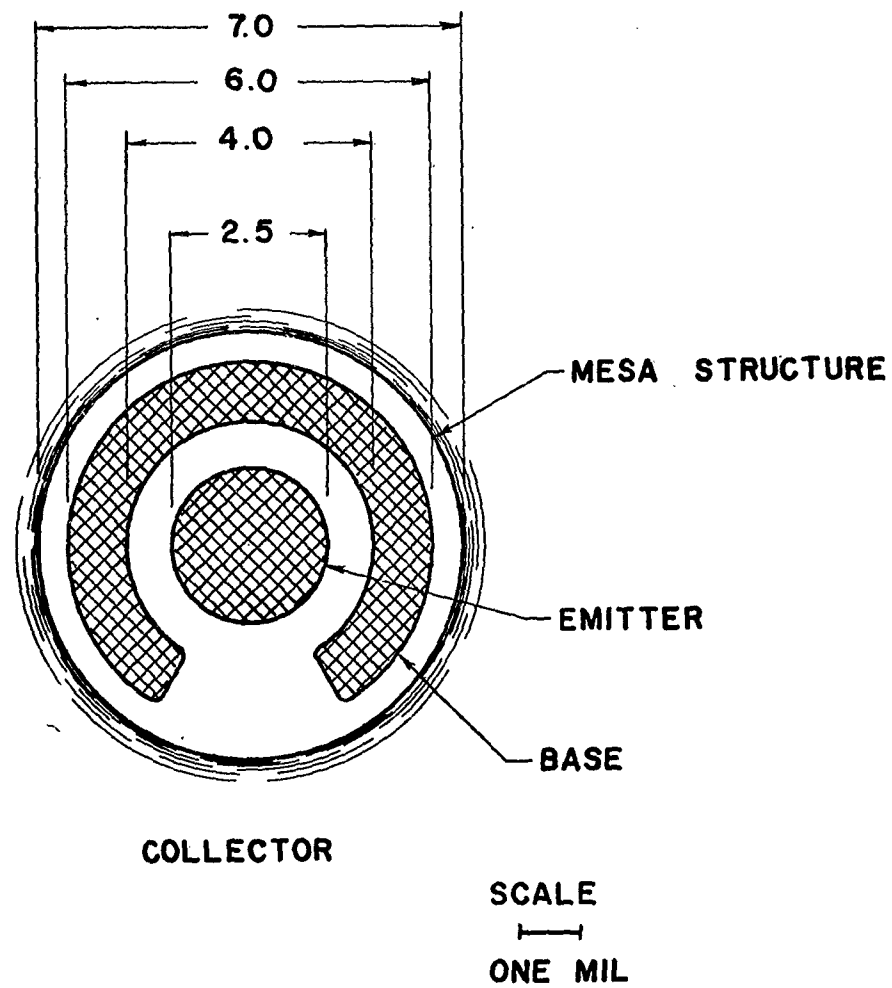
ACTUAL DIMENSIONS OF TRANSISTOR GEOMETRY
